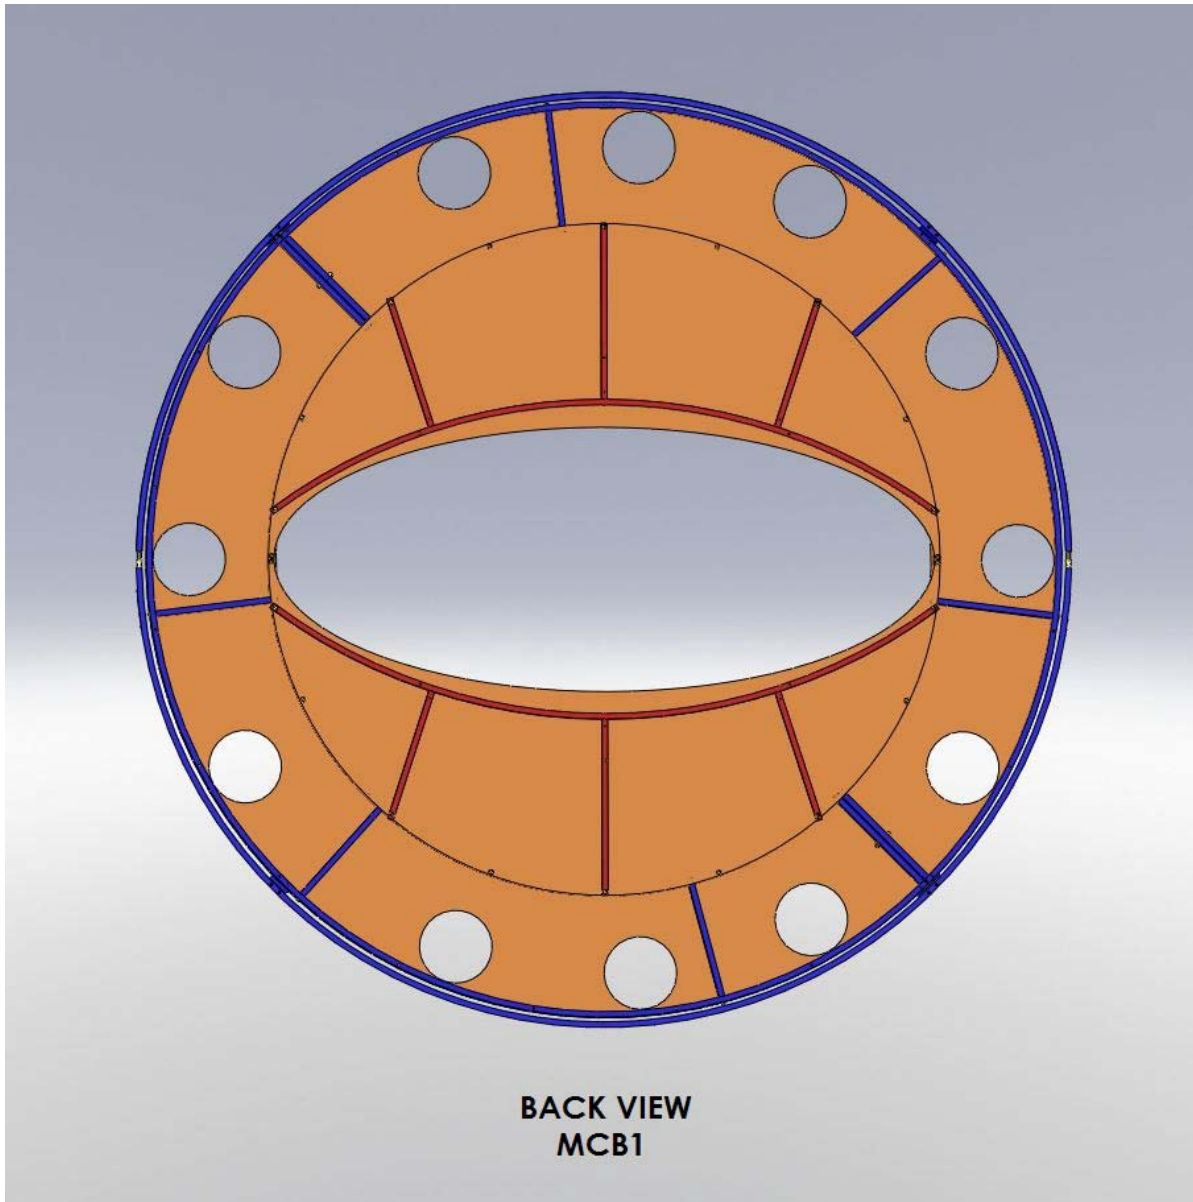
Back View of MCB1 Mode Cleaner Tube Baffle
